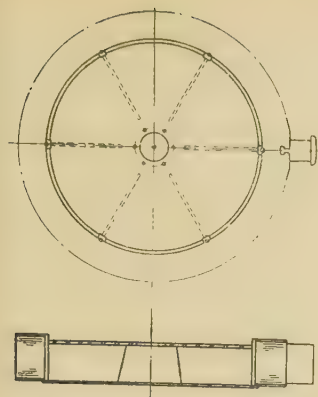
(left). Construction of rotor with laminated rim surrounding a central cast or fabricated steel spider
